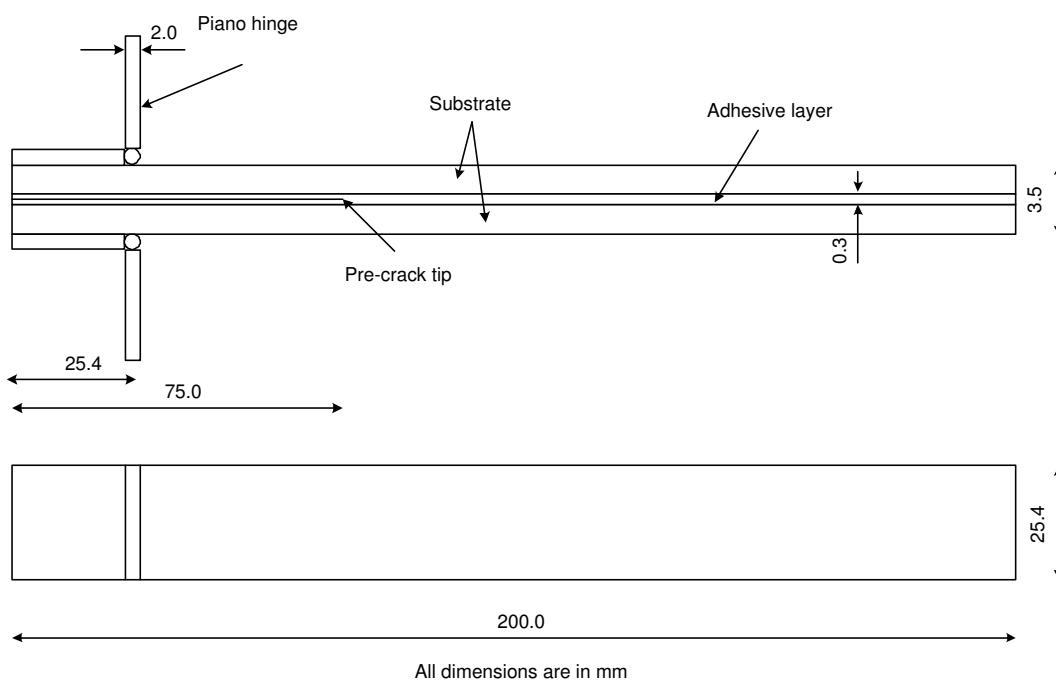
Schematic diagram of a typical double cantilever beam (DCB) test specimens.
